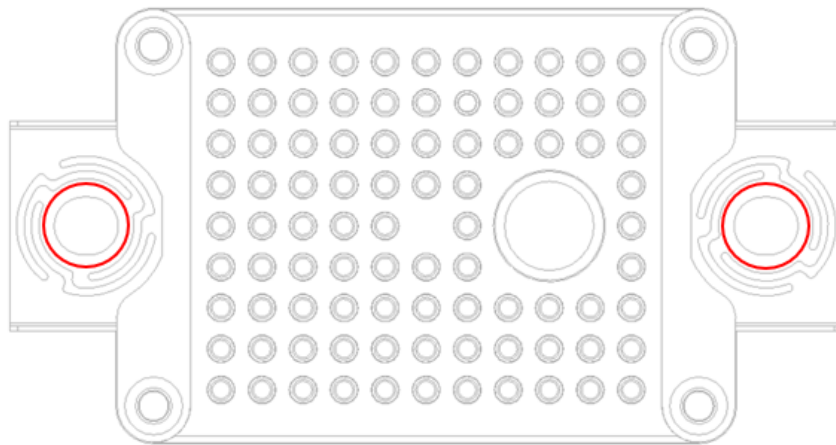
M4 Screw Mounting Position on SICPAK™ F Module
